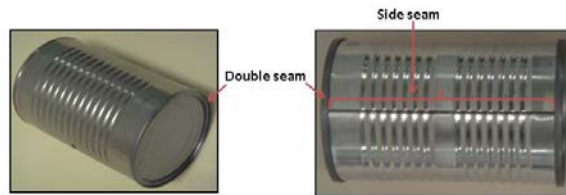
Cylindrical Shape 3-Piece Steel Containers with a Double Seam and Side Seam
